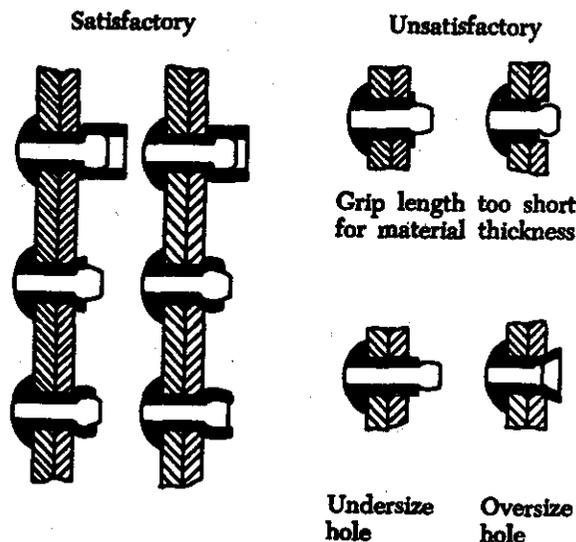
Inspection of self-plugging (friction lock) rivets.
